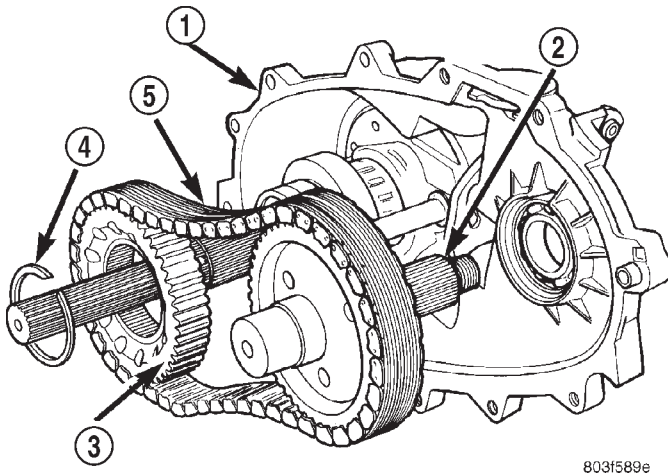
Front Output Shaft, Drive Gear And Chain Removal
